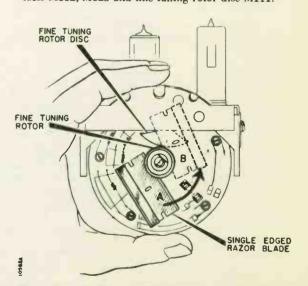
Front View of VHF Tuner Showing Method of Inserting Fine Tuning Disc and Fine Tuning Rotor.
